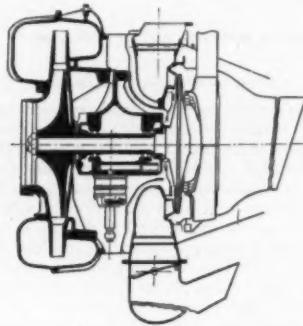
TURBOSUPERCHARGER CROSS SECTION
